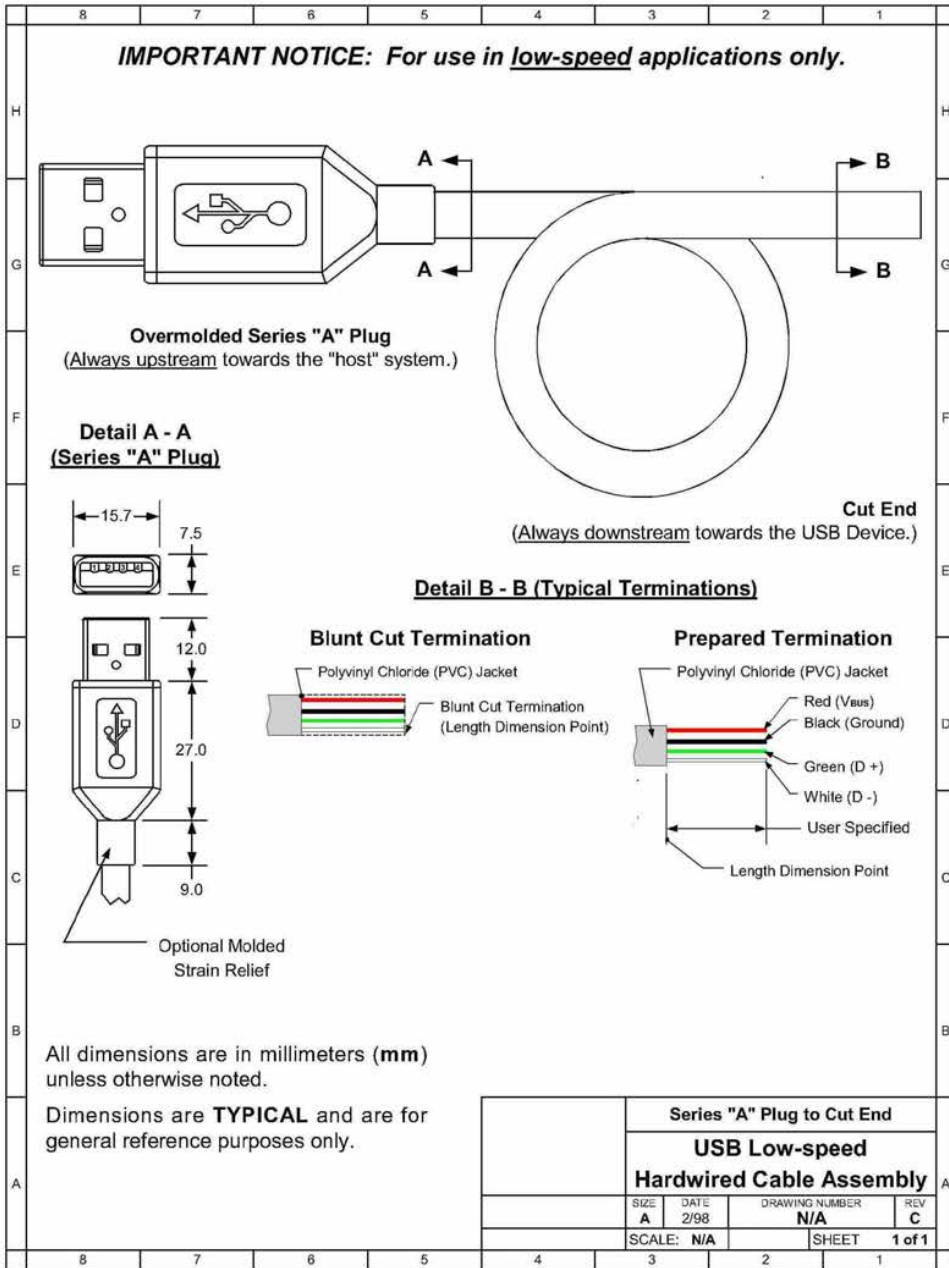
USB Low-speed Hardwired Cable Assembly
